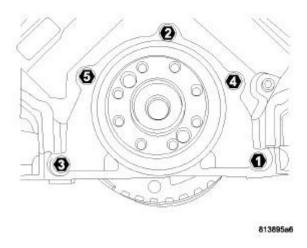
REAR SEAL RETAINER TORQUE SEQUENCE Courtesy of CHRYSLER LLC
